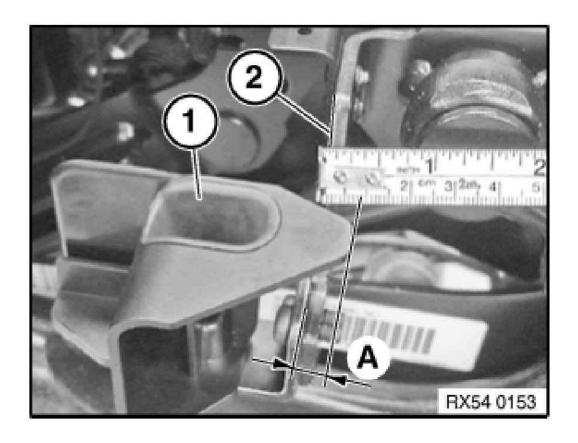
Removing Camouflage For Main Bearing Courtesy of BMW OF NORTH AMERICA, INC.
